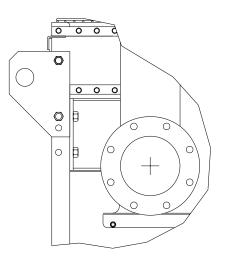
D - END VIEW OF TANK SHOWING LIFTING LUG POSITION
